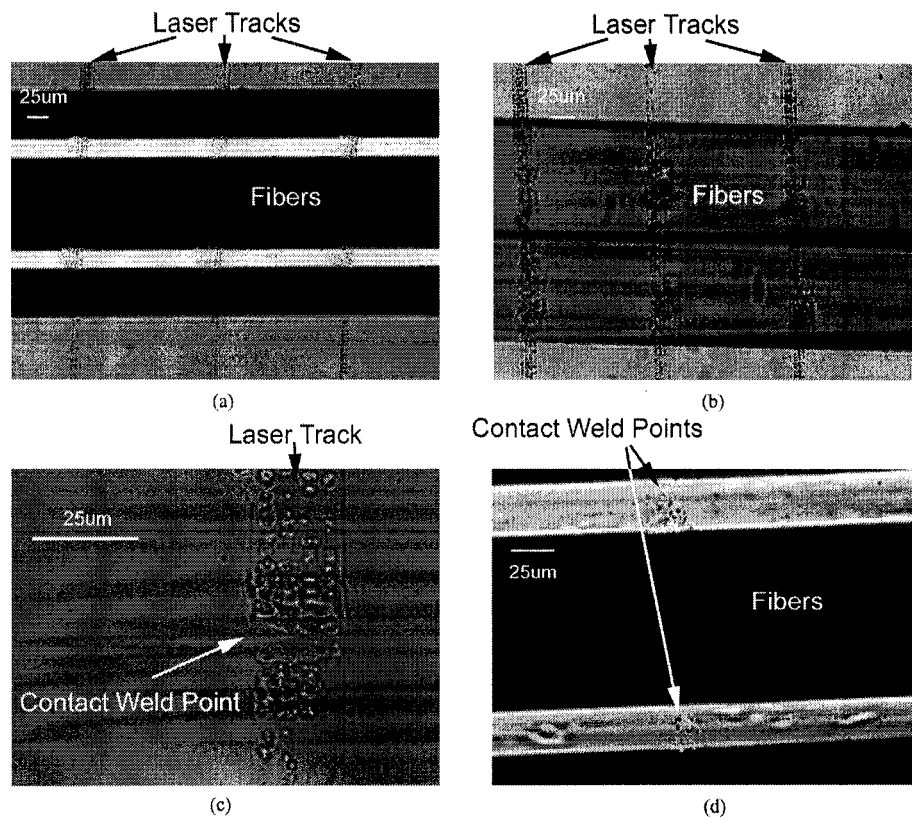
Optical microscope images of the welded optical fibers on a fused silica coverslip. 20x magnified images of back surface welding lines and contact points imaged from (a) the fiber side and (b) the fused silica side. (c) 100x magnified image of back surface welding lines and contact points imaged after the optical fiber was pulled off from the fused silica coverslip. (d) 40x magnified image of the optical fiber surfaces after they were pulled off.
